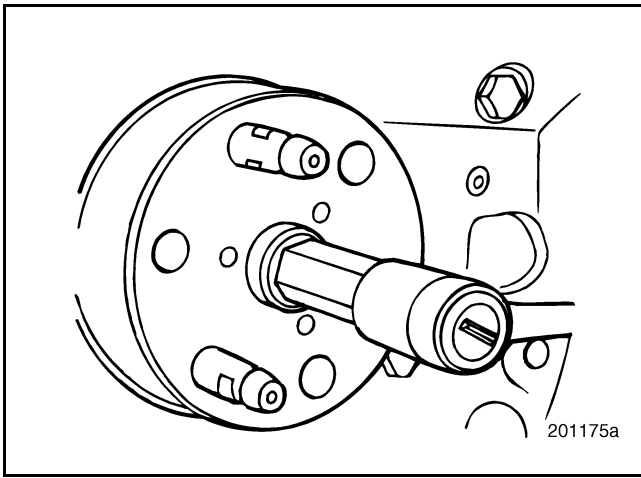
Crankshaft Wear Ring (with Double-Lip Teflon® Seal) Installation
